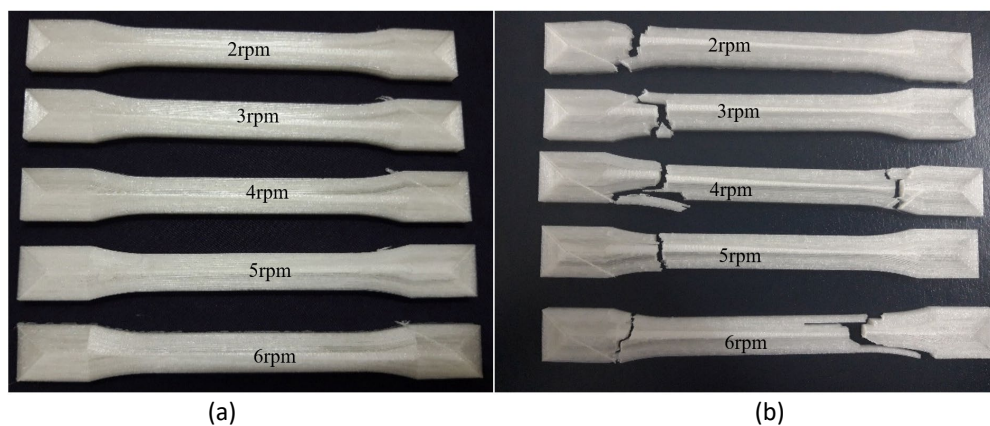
Tensile specimen of tensile testing under 155°C (a) before testing (b) after testing
